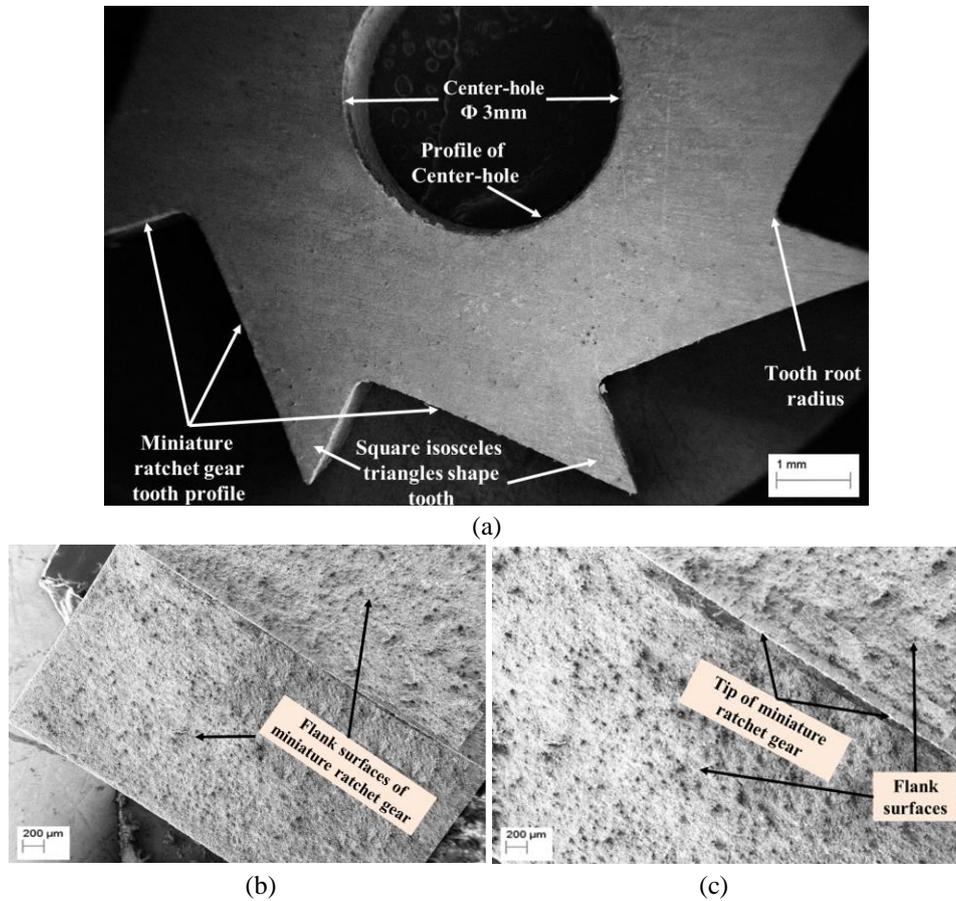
Scanning electron micrographs of miniature ratchet gear manufactured at optimal parameters of wire-EDM: (a) gear teeth profile; (b) and (c) magnified flank surfaces
